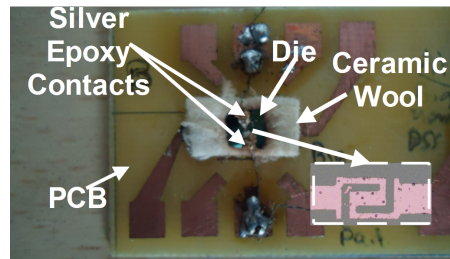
PCB mounted die, with die resting on ceramic wool. Inset shows the expanded view of the S-Shape microheater
